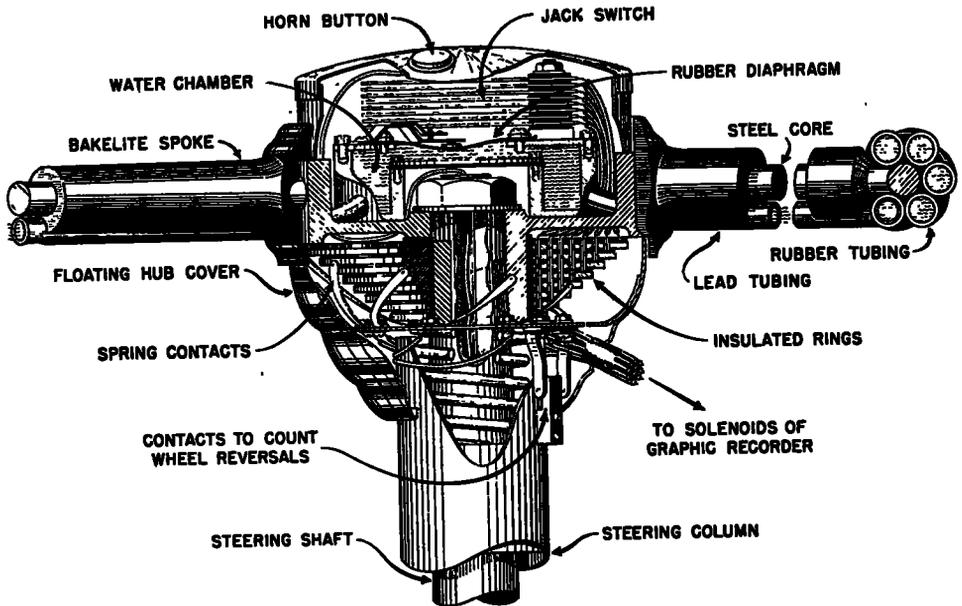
Steering Wheel Assembly Used for Recording Changes in Hand Pressure on Rim and Reversals of Wheel.
